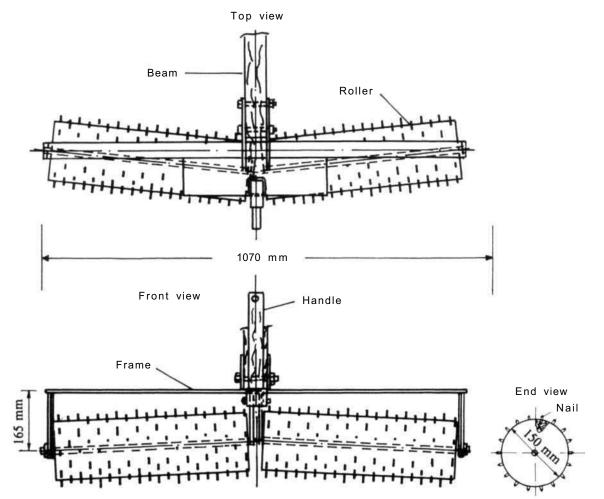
Engineering details of inclined-roller crust breaker, developed at ICRISAT Center.
